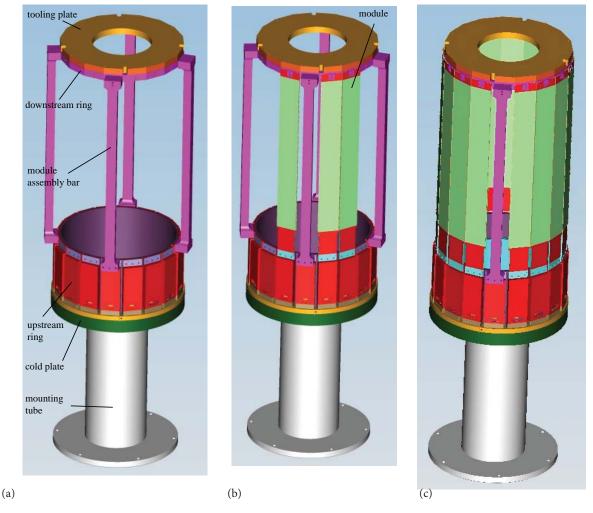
(a) Cold plate, upstream ring and downstream ring in position prior to assembly of modules, (b) during assembly of modules, and (c) just prior to removal of final assembly bar.
